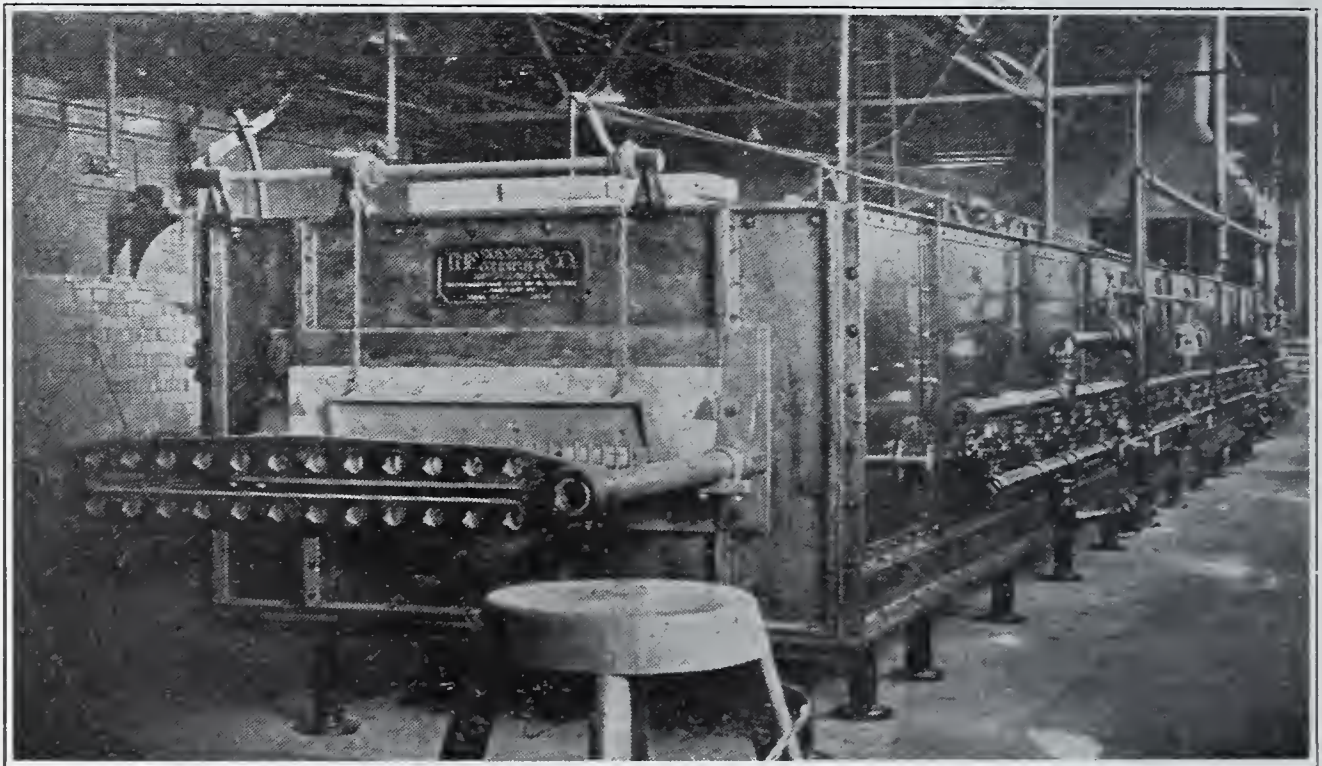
Surface Combustion Wire Patenting Furnace—Intake End.
